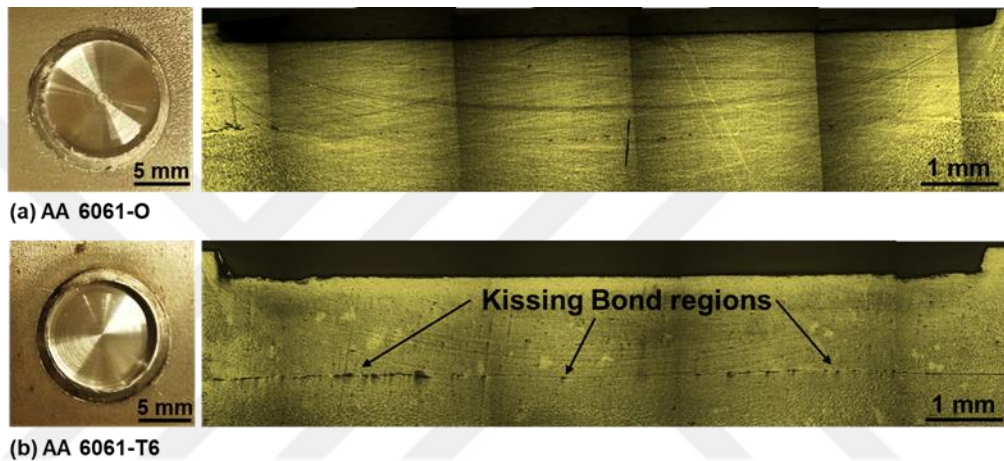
The IL-FSSW welds surface's appearance of the aluminum sheets
